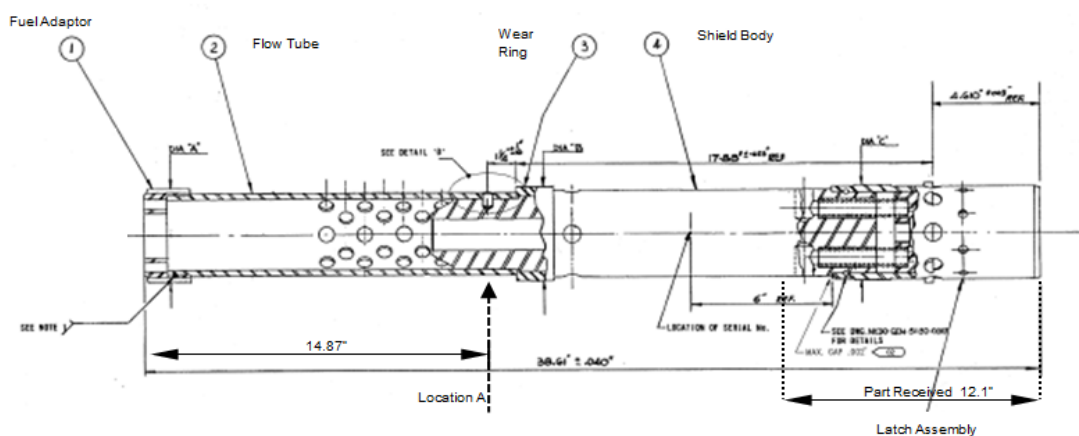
Cross-sectional View of the Pickering Shield Plug Assembly
